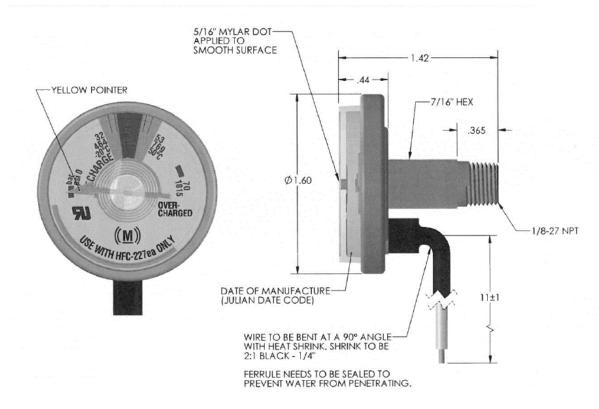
42 bar Pressure Gauge with Low Pressure Switch
